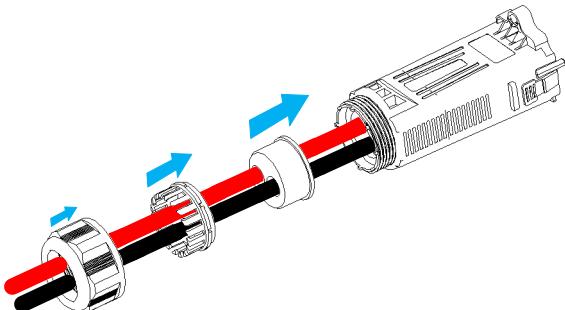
Thread Battery Cable and Assemble Protective Cover
